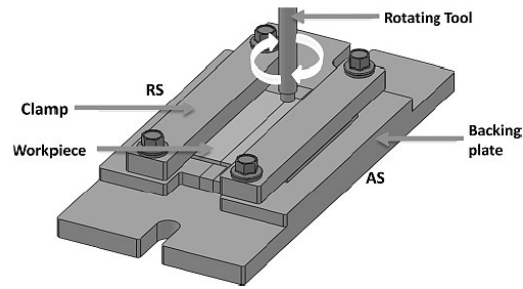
Schematic diagram of experimental setup in the friction stir butt welding process.
